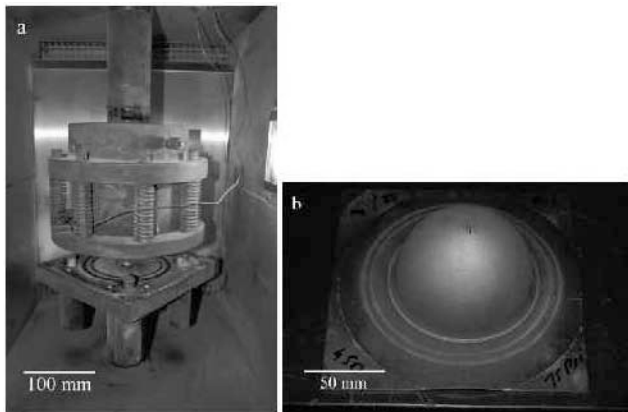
(a) The biaxial bulge testing dies and (b) a tested specimen are shown
